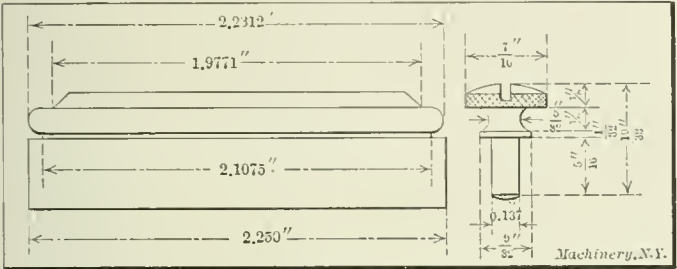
Dimensions of Work and Tool in the Practical Example Given
